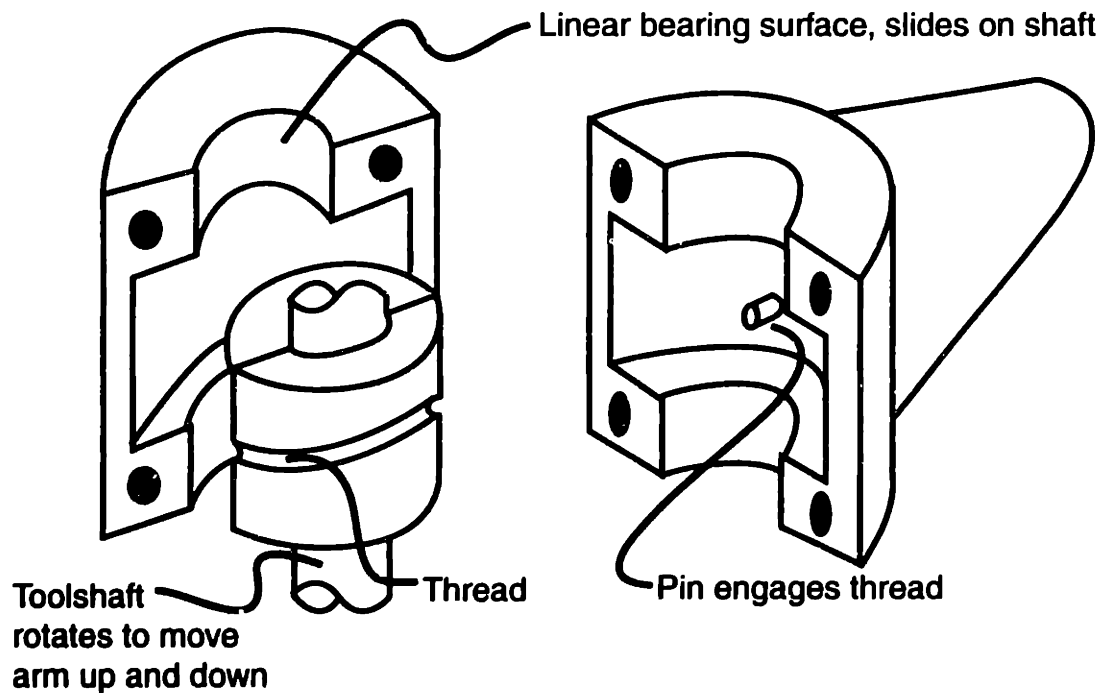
Concept 3 - "Pin in thread" with linear bearing design.
